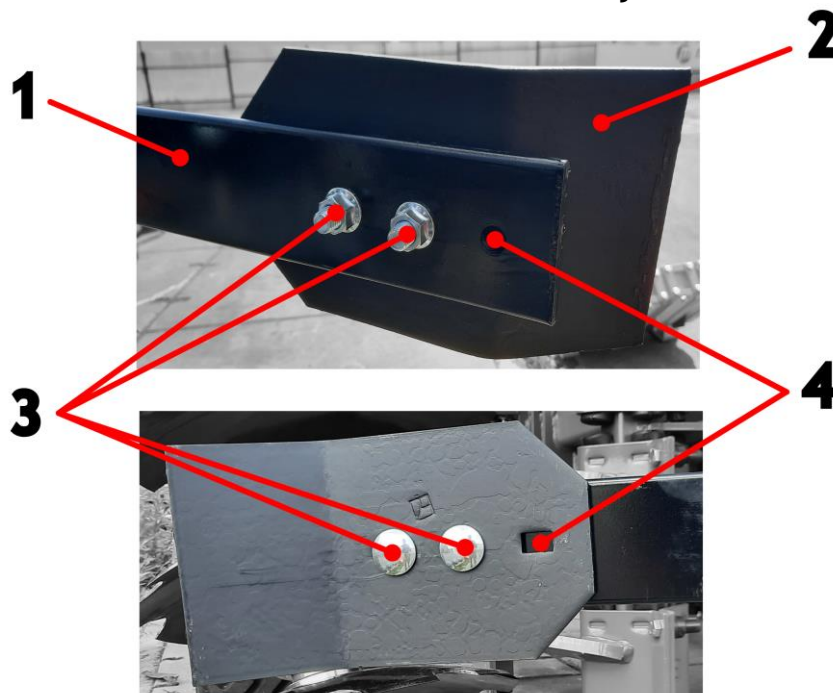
SKAN harrow tooth (1 - harrow, 2 - tooth, 3 - mounting bolts with nuts, 4 - adjustment holes)
